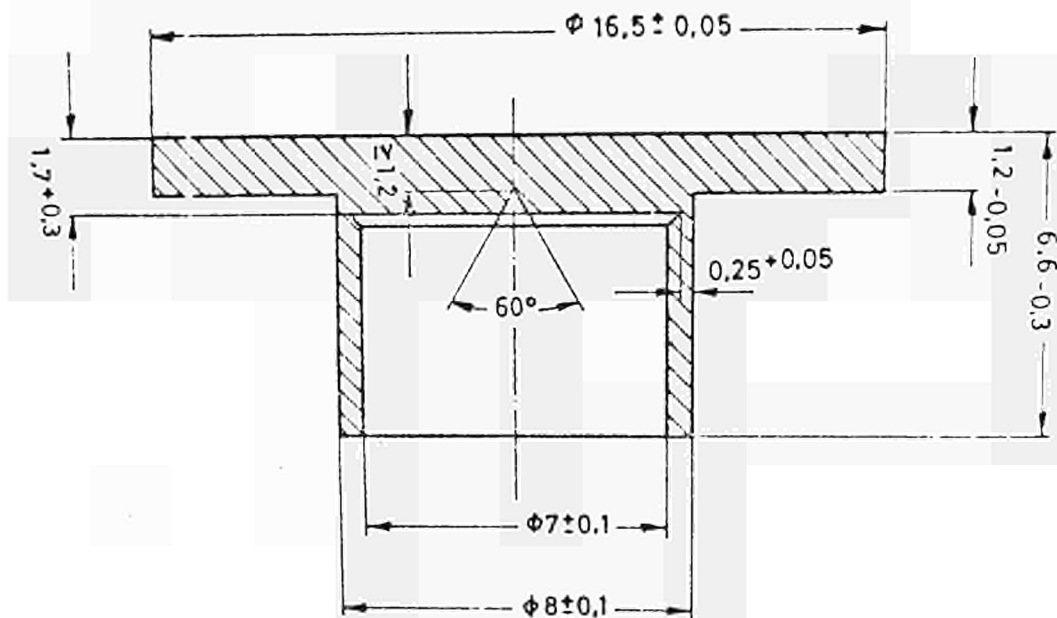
Dimensions and tolerances of a rivet seal.
